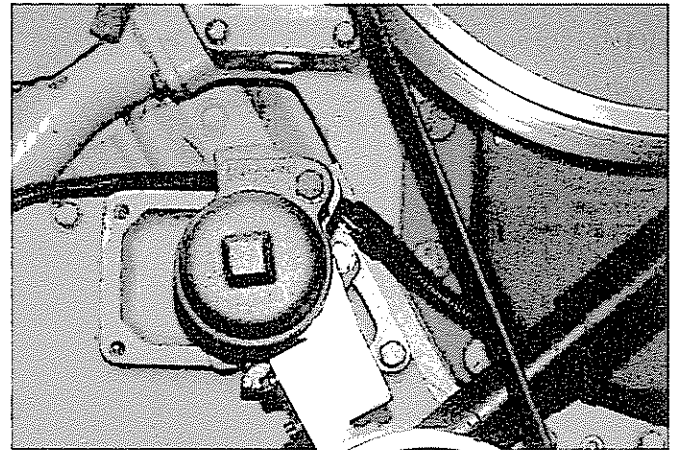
D-03 - Fan Hub Idler Pulley Assembly
